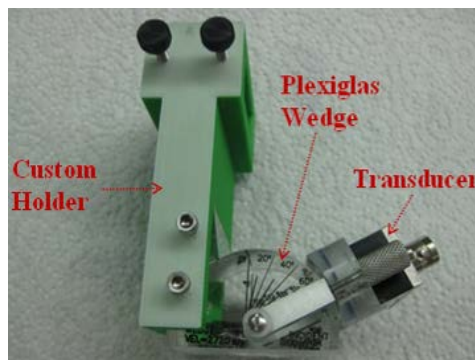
Ultrasonic transducer, angle beam wedge, and transducer holder assembly.
